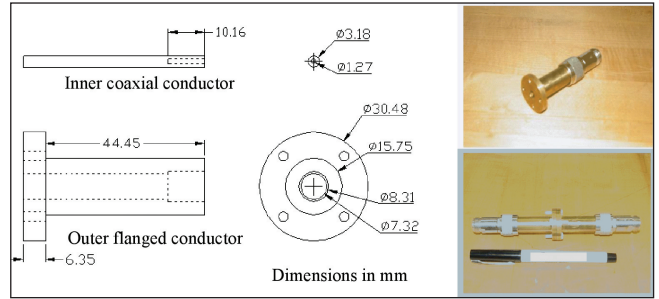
Manufacturing drawings and photos of the newly developed SE tester.
